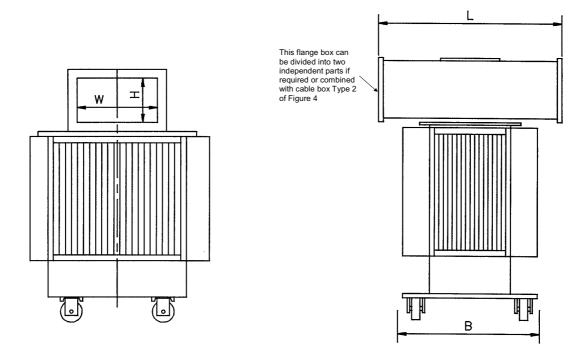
Transformers with cable boxes, Type 1 cover mounted
